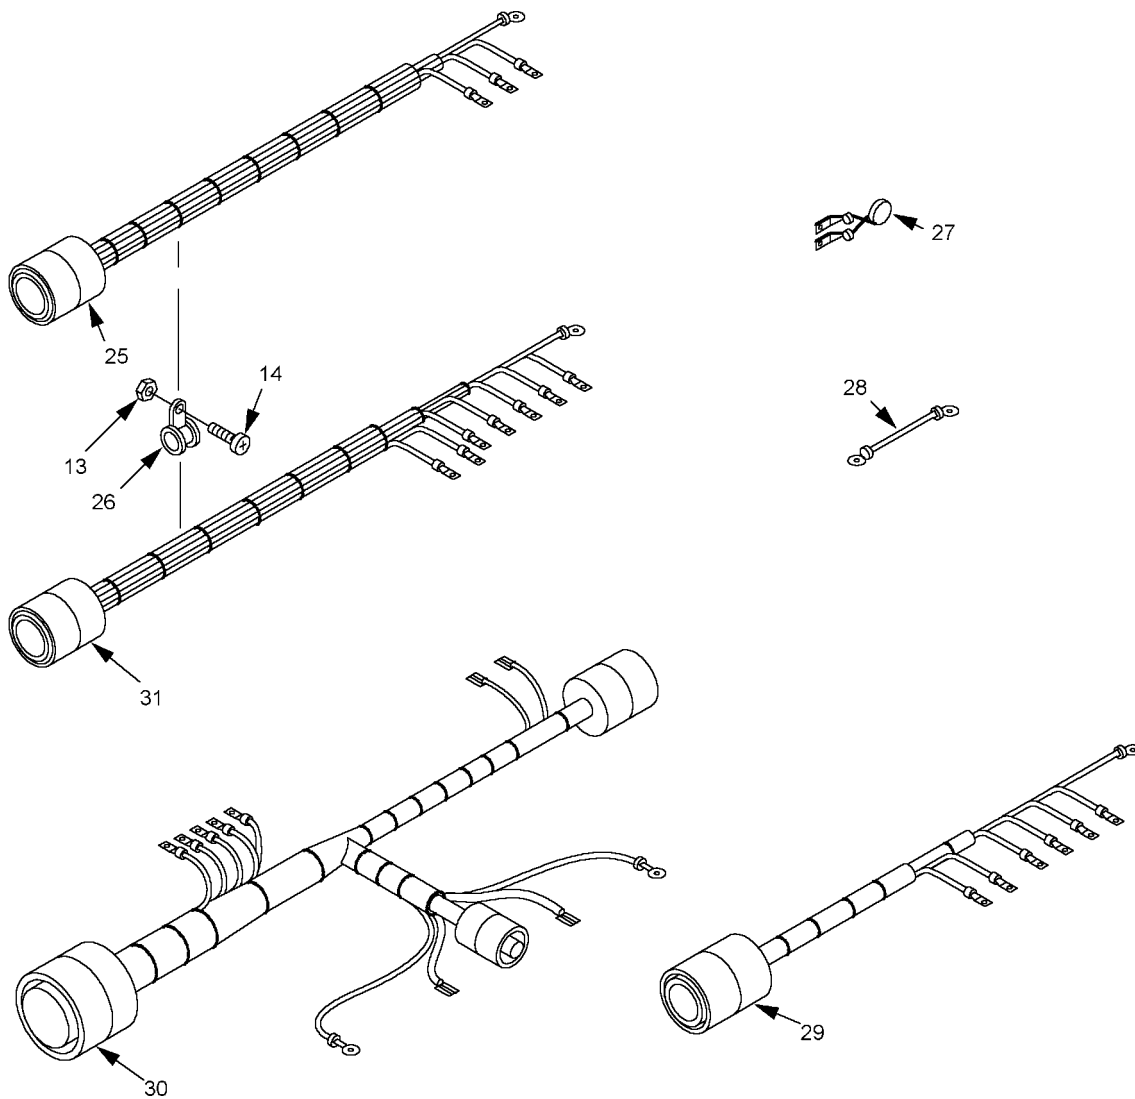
Condenser Assembly (Sheet 3 of 6)
